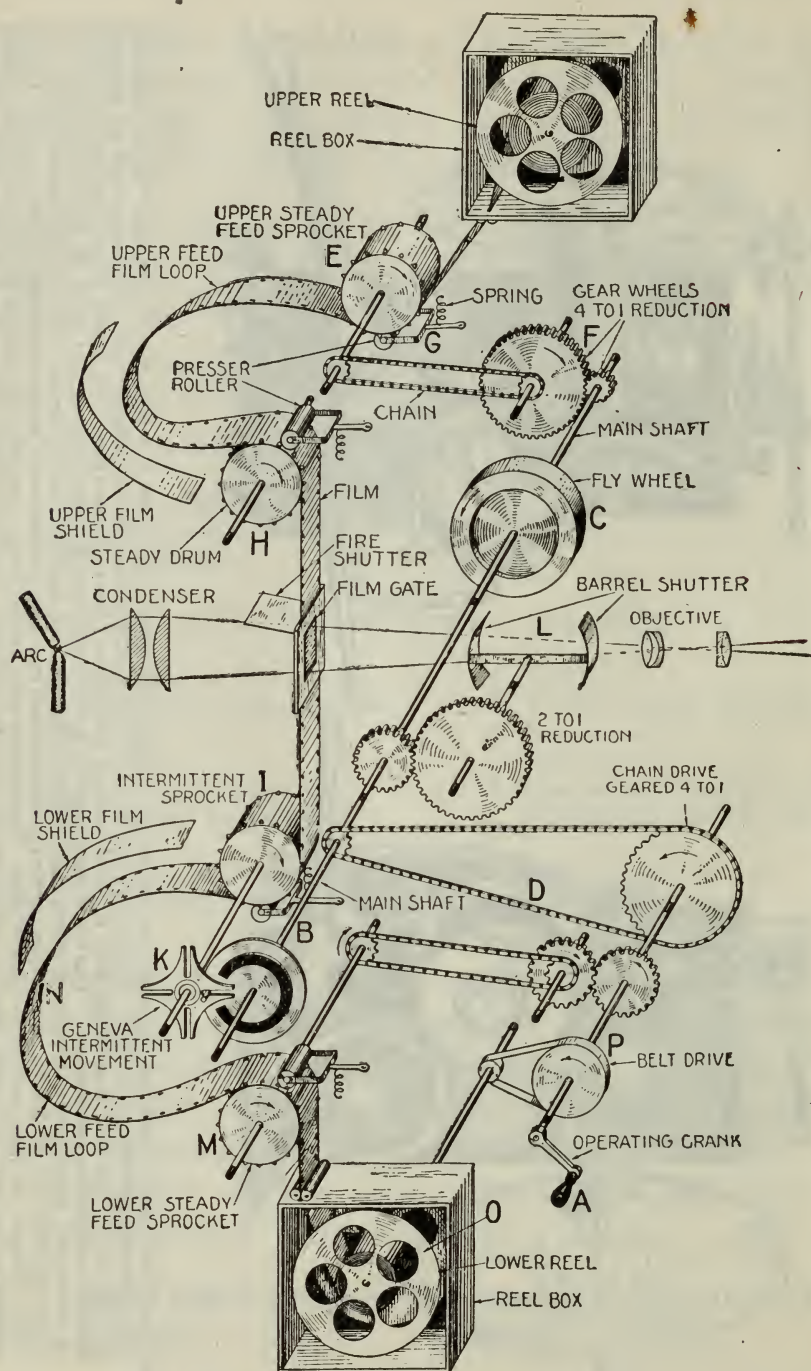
,819.—Elementary moving picture machine without case, showing essential parts.
